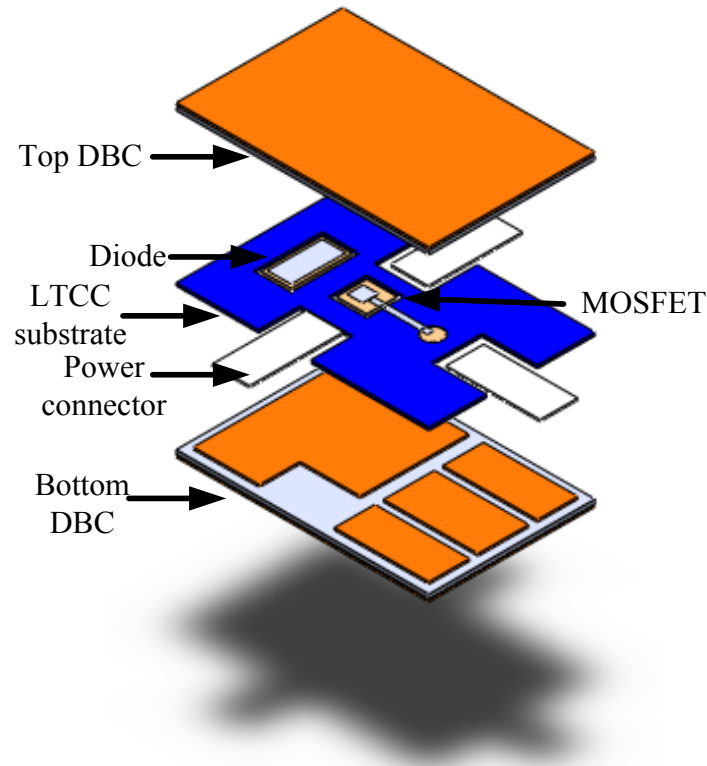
Exploded view of the LTCC based double-sided cooling module
